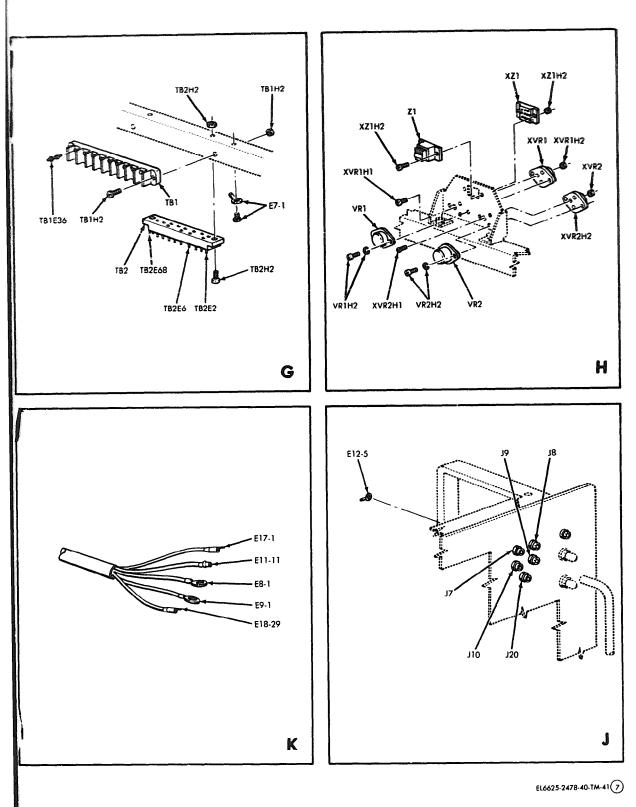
(7). Test set panel assembly 1A3, location of parts (sheet 7 of 7).
